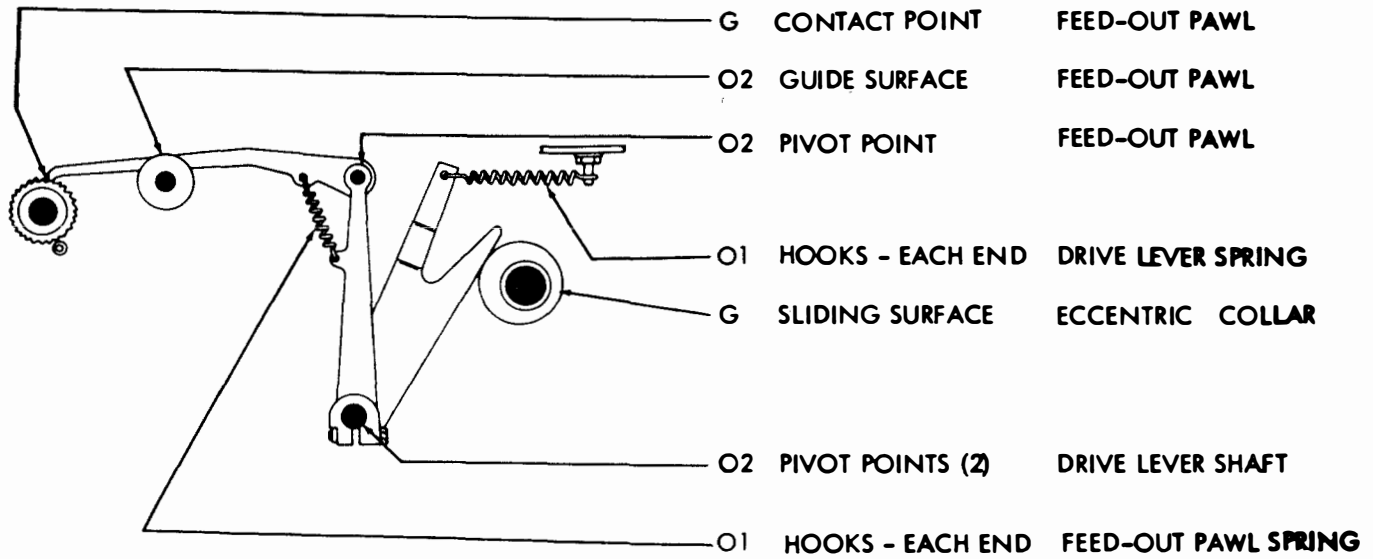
Remote Control Noninterfering BLANK Tape Feed-Out Mechanism (Sheet 2 of 5)
